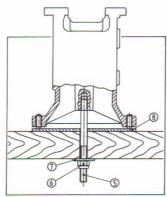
Section through lathe bed mounted on a bench showing securing stud, bench support plate etc.
